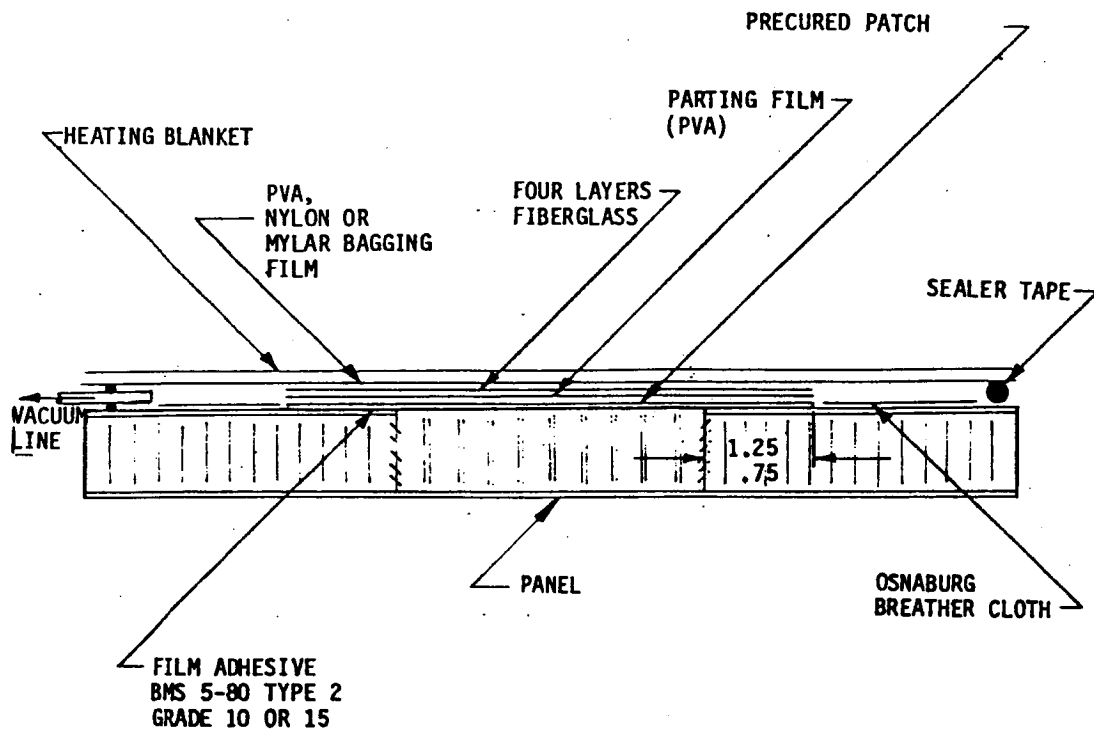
LAY-UP ASSEMBLY FOR REPAIRING A FACE SHEET
